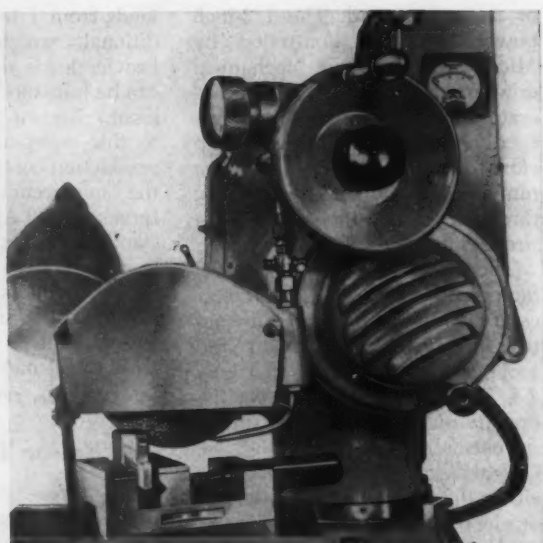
Setup for surface grinding on the "Revlac TriGrinder"
